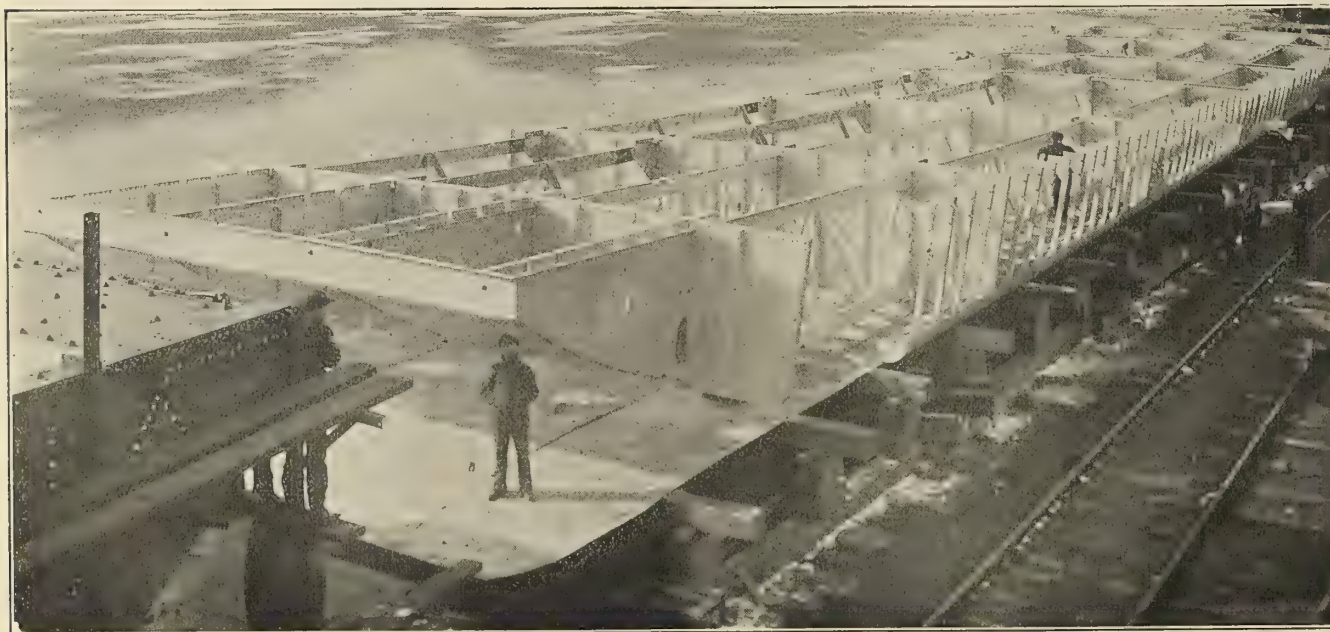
The Hull Under Construction, Showing Framing, Transverse Bulkheads and Longitudinal Trusses
